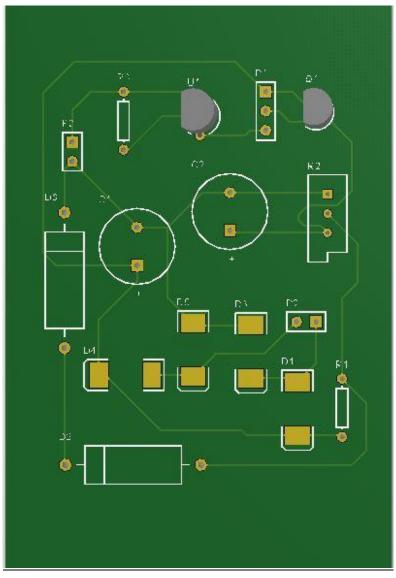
\*3 pcb (Here I design pcb and schematics only for the voltage adjustment circuit)
